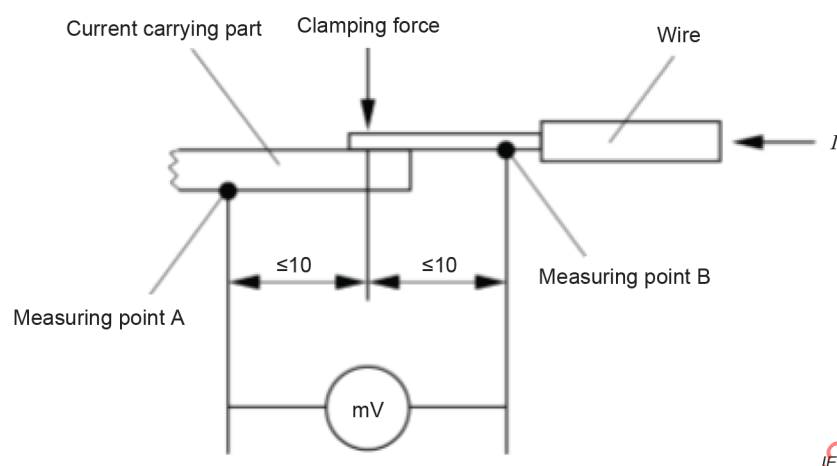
Voltage drop measurement at contact point of the clamping terminal
